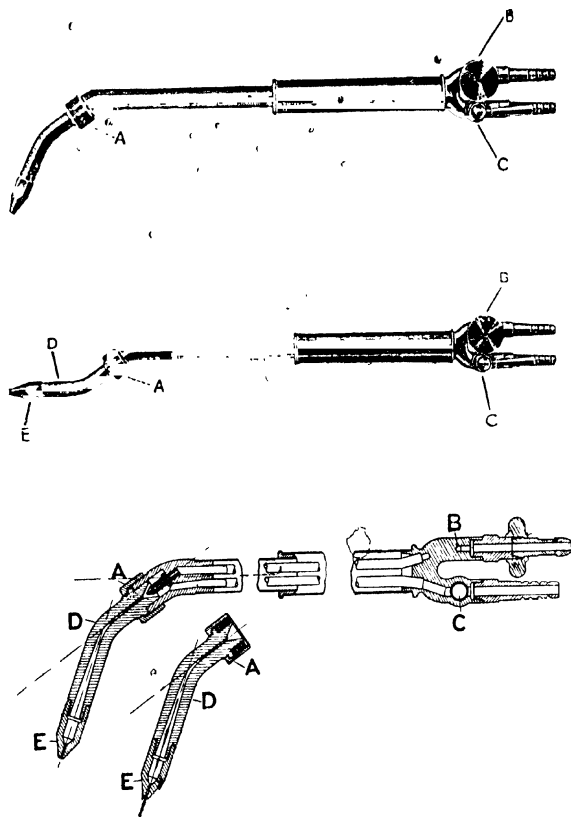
INJECTOR BLOWPIPE FOR OXY-ACETYLENE WELDING.
